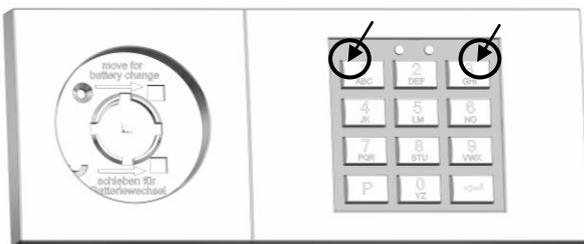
Dismounting the keypad sub-assembly, to do so, carefully apply pressure to the upper part of the keypad frame
